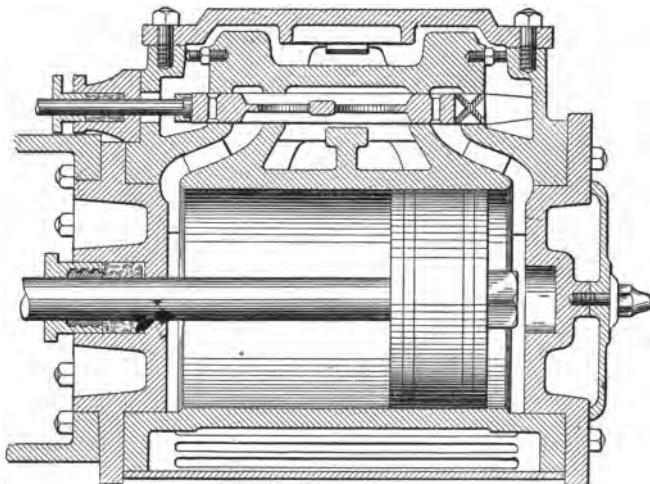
Section of Cylinder, Slide-Valve Engine.
